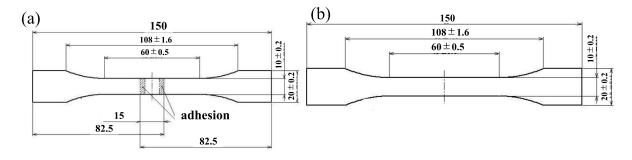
Dumbbell-shaped test pieces (a) with adhesion and (b) without adhesion.
